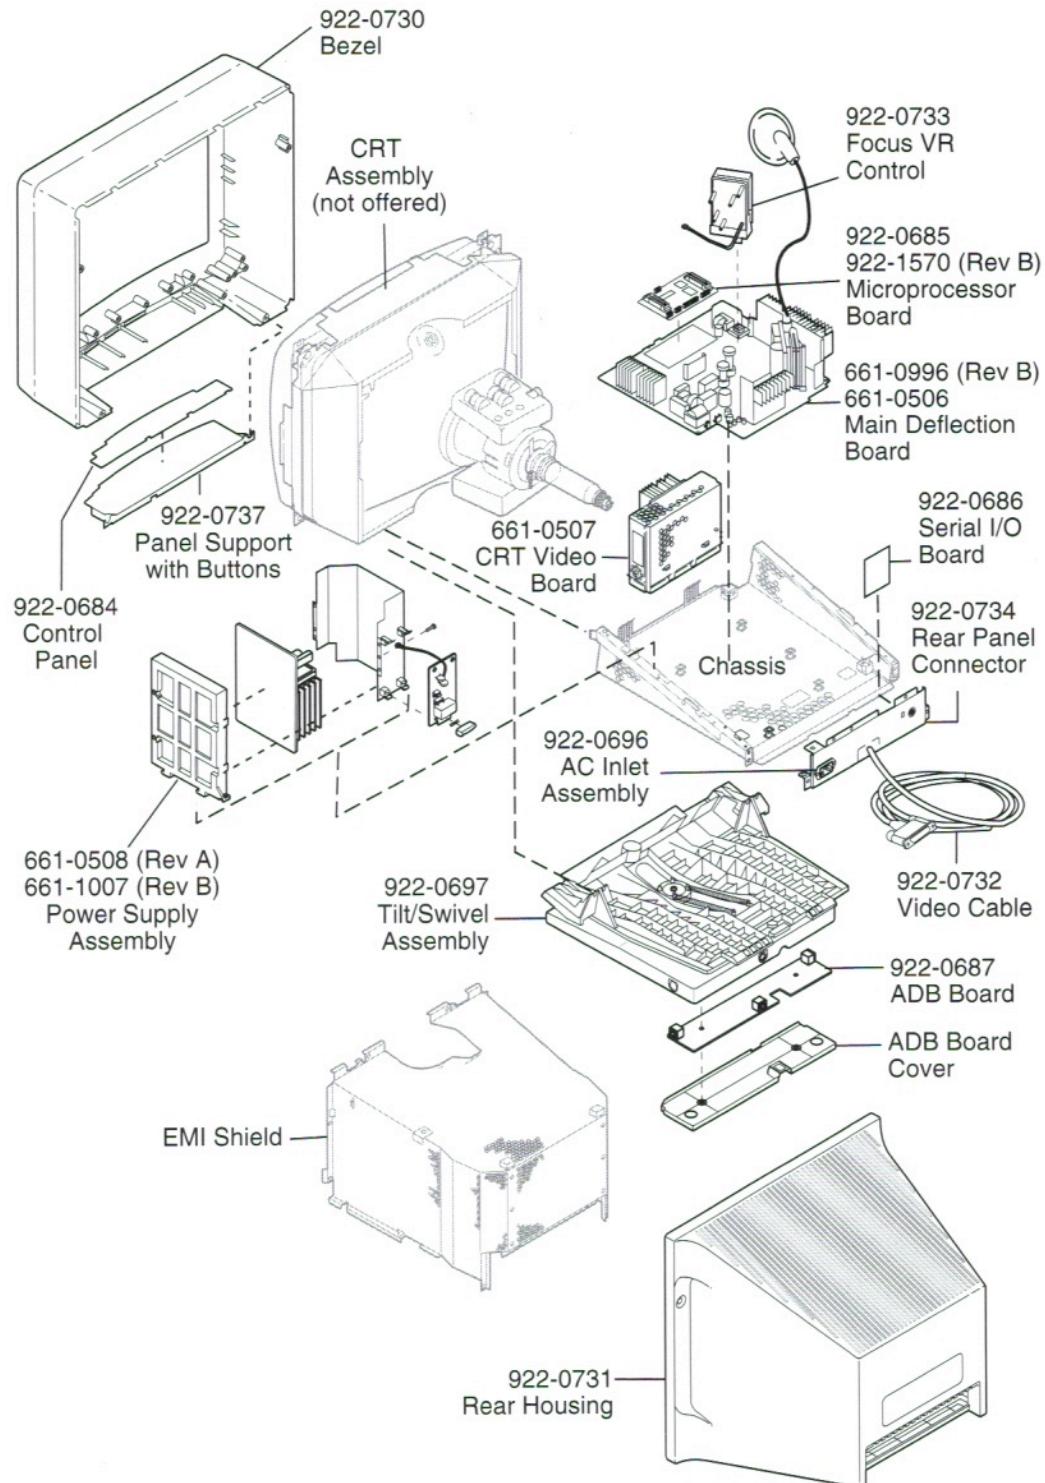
Apple Multiple Scan 20 Display & Rev B Exploded View
